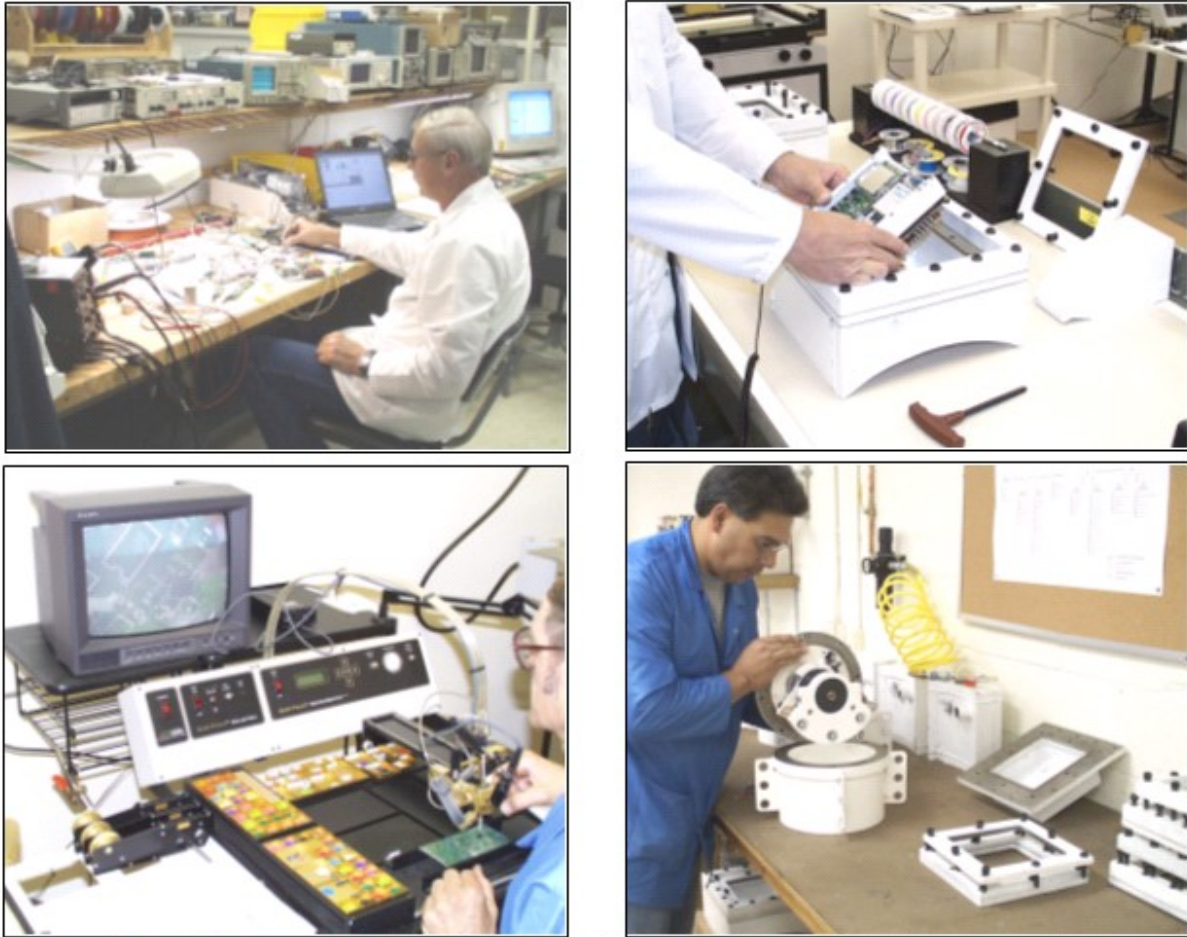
Horizon Sensor production facility including: circuit board assembly (lower left), circuit board testing(upper left), sensor module assembly (upper right), and generator module assembly (lower right)
